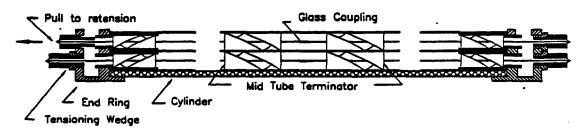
Assembly of tested straw tube drift cell onto the support cylinder.
